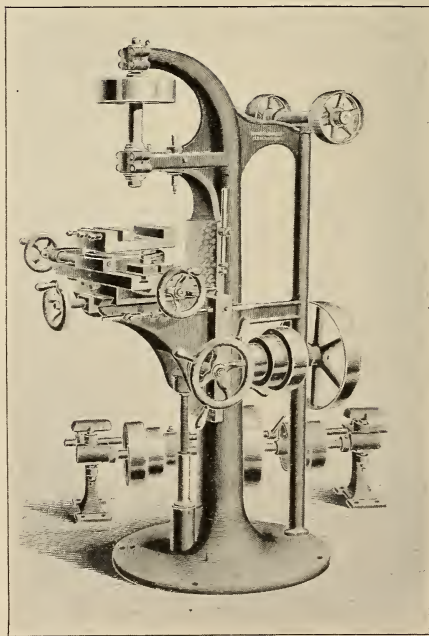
A MODERN VERTICAL MILLING MACHINE
